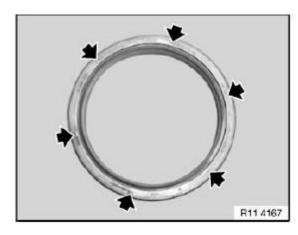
Locating Crankshaft Radial Seal Courtesy of BMW OF NORTH AMERICA, INC.
